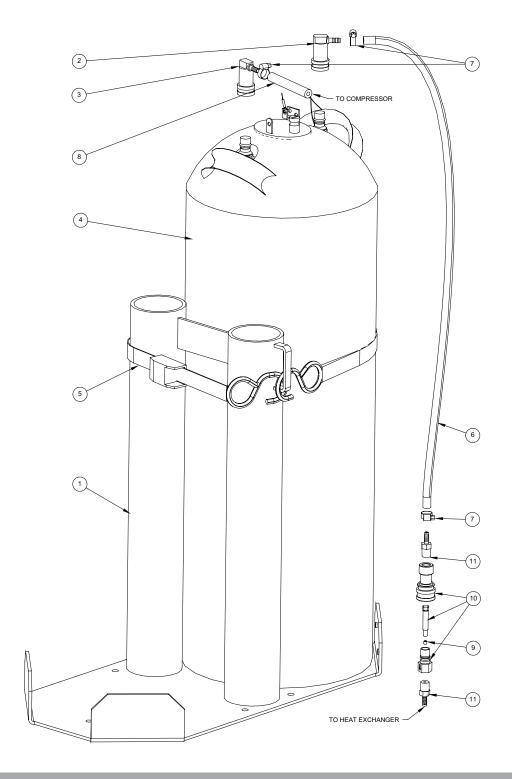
Blower Heat Exchanger Assembly D-6159 Rev -
